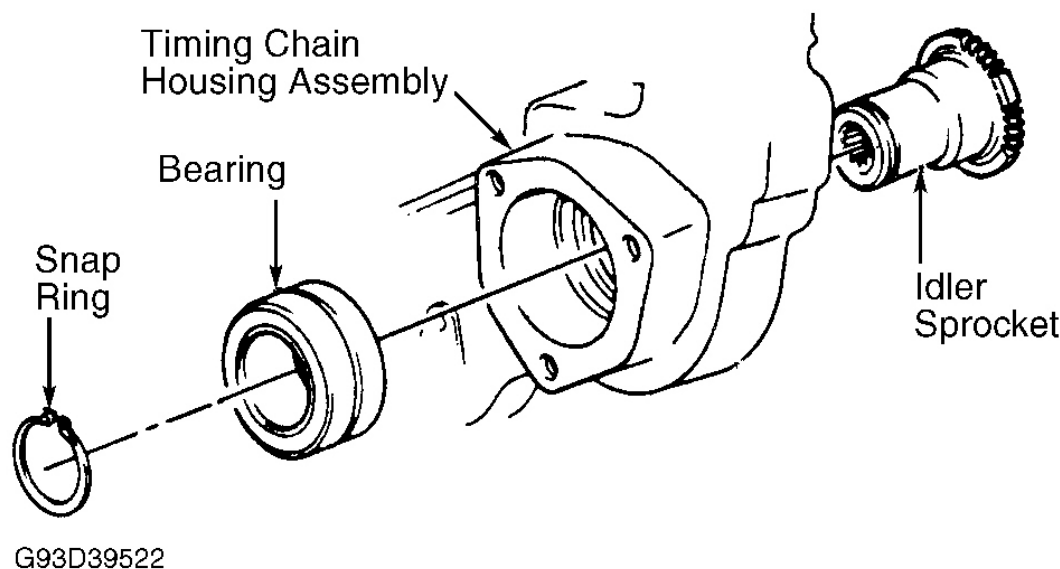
Exploded View Of Timing Chain Idler Sprocket Assembly
